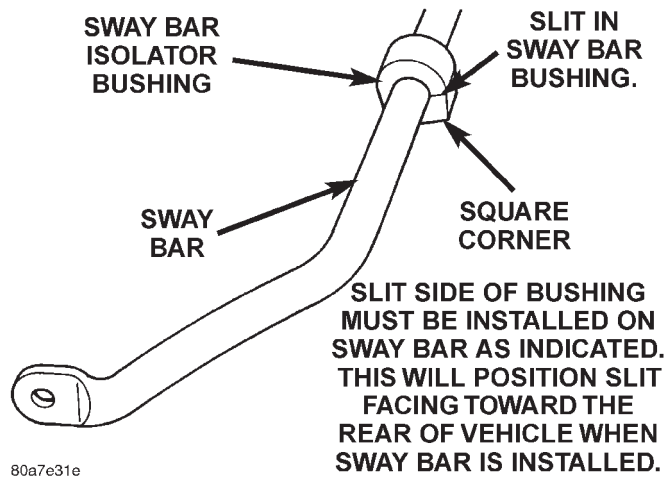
Correctly Installed Stabilizer Bar To Cradle Bushing
